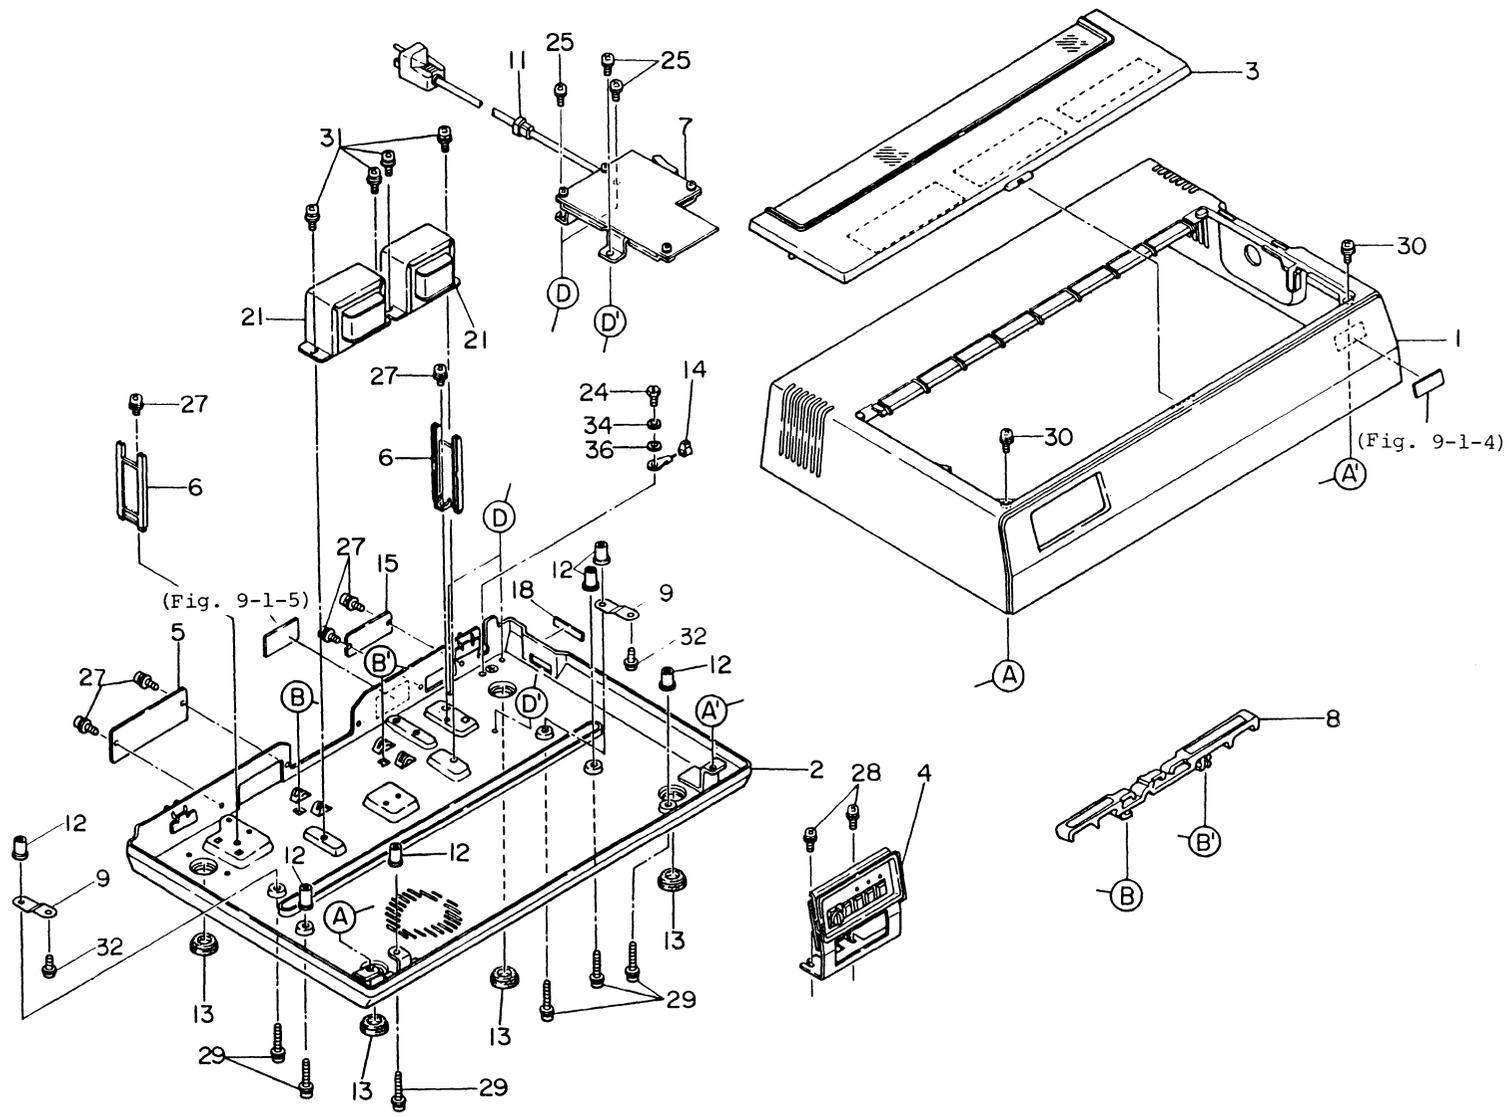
Cover Unit (1LM-61285-2) (for USA) (for 115 V)
